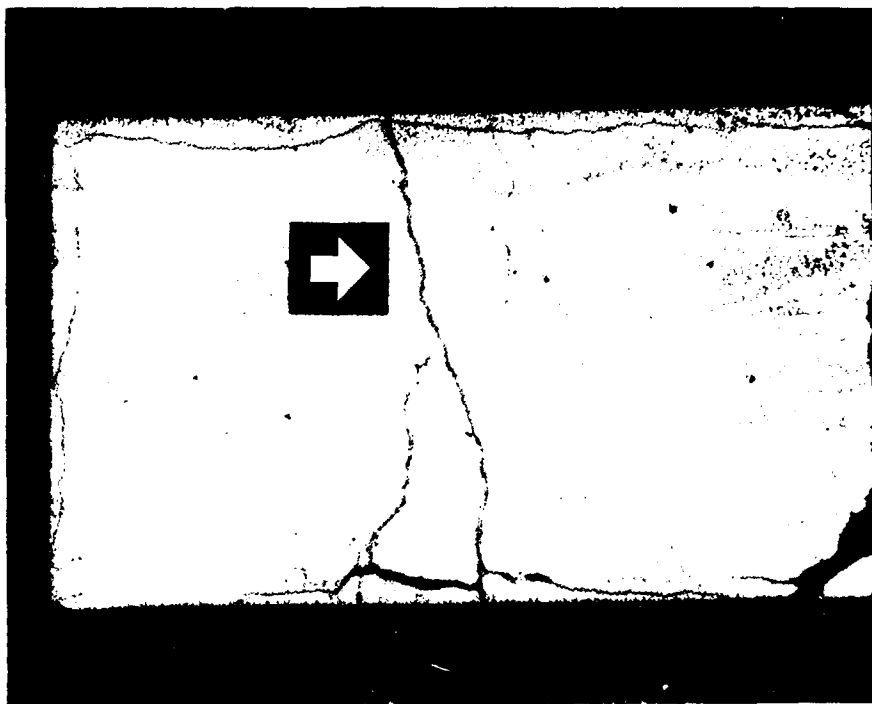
Sectioned Specimen Showing Through Crack (90G0504)
